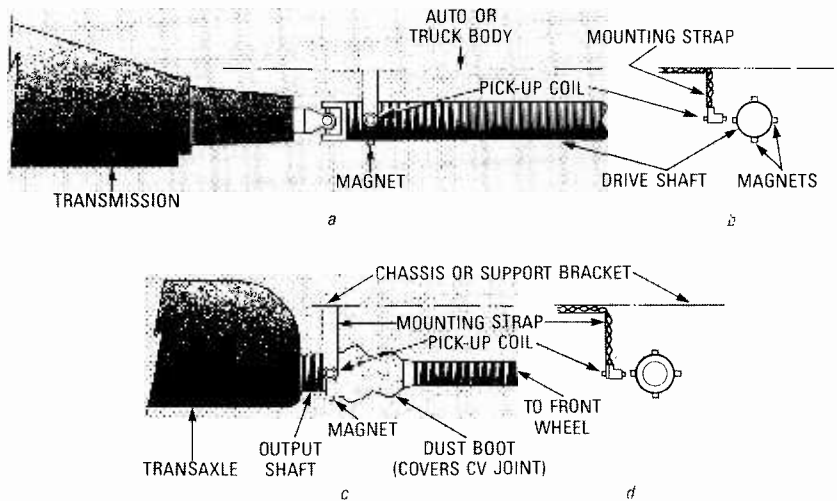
MAGNET AND PICKUP-COIL MOUNTING METHODS: For a car with a transmission and driveshaft, mount the magnets and pickup coil as shown in *a* and *b*, respectively. For a car with front-wheel drive, mount those parts as shown in *c* and *d*.
